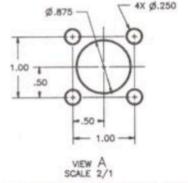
Complex features or patterns of features may be dimensioned in removed views.
